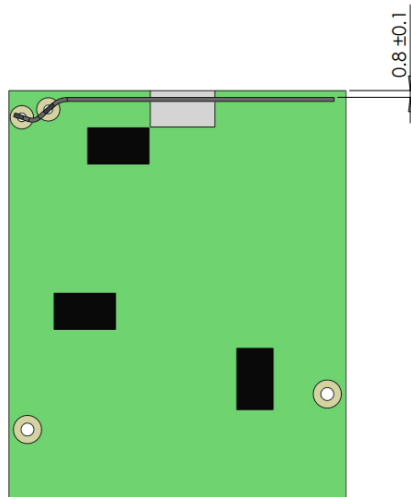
Top view of main PCBA with recommended distance from PCB edge
